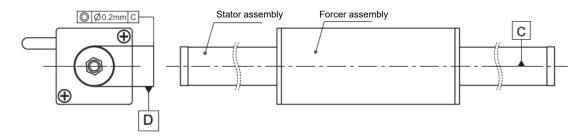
Geometric tolerance of forcer and stator assembly installation height
